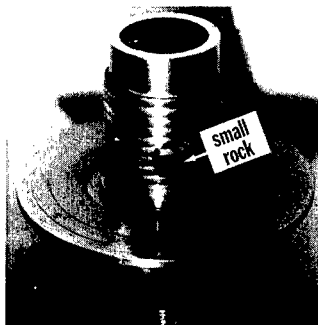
Rock in fuel sump drain valve allowed it to be stuck in open position.
